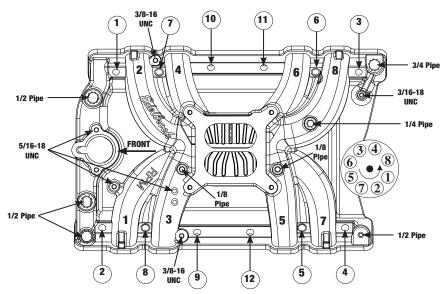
400-455 c.i.d. Oldsmobile Intake Manifold Bolt
